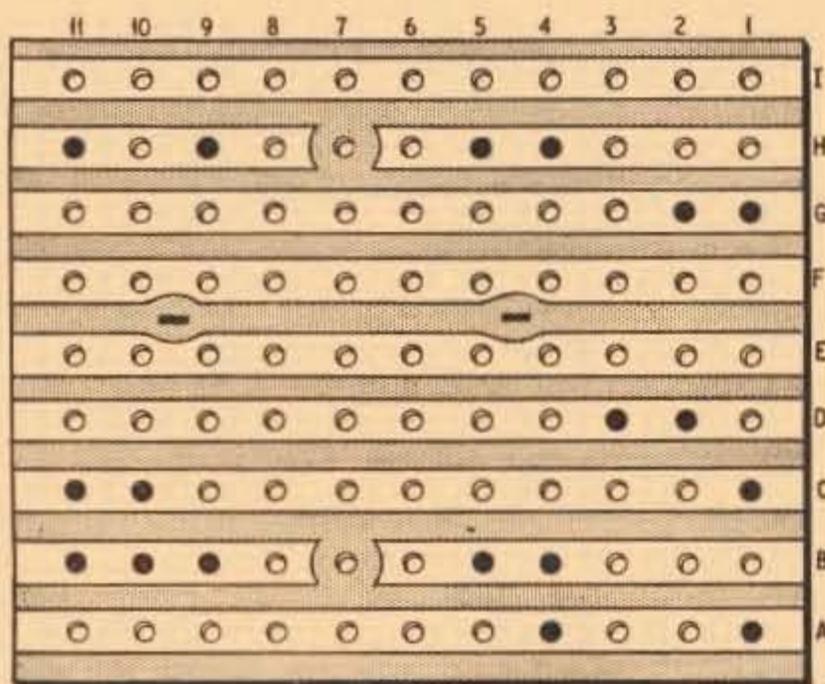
Underside view of the board showing the copper strip breaks and position of the transformer mounting lugs
